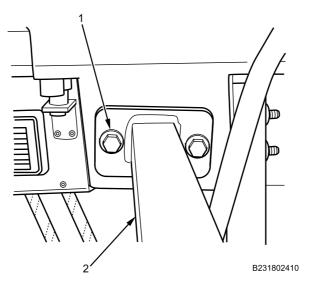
Left Side Gunner Platform Stand Mounting Bolts.
